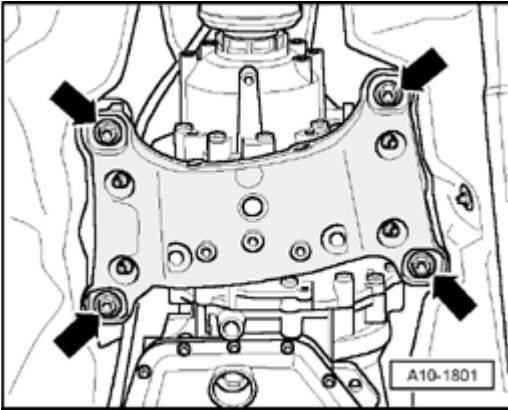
Removing/Installing Bolts At Tunnel Cross Member
